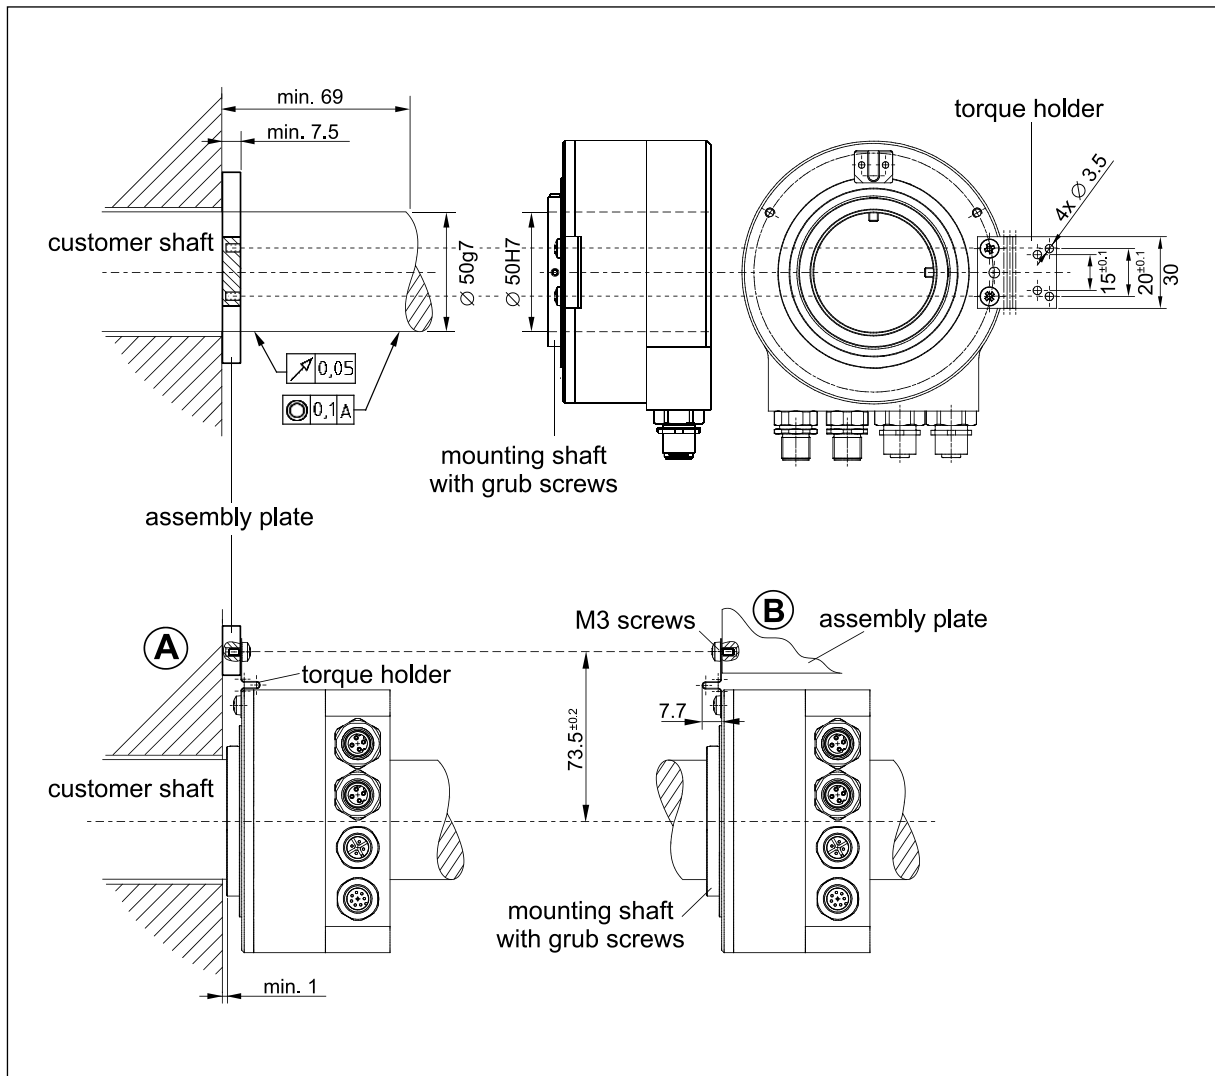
Type with torque holder (sheet-metal spring) with  $\varnothing 50H7$
